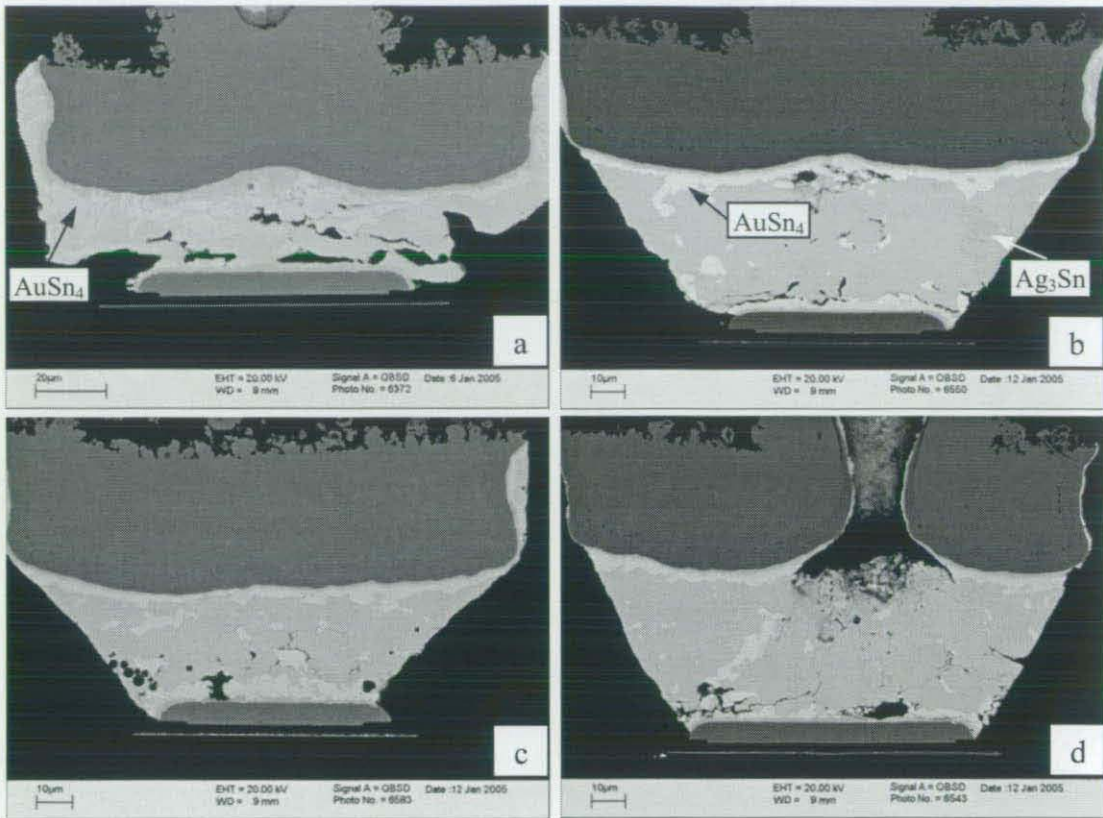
Failure modes of solder joints when pads with micro-via were used, a) failure at AuSn_4 /solder interface, b) failure at AuSn_4 /solder interface and Ag_3Sn formation, c) failure in bulk solder and d) failure at AuSn_4 /solder interface and in bulk solder.
